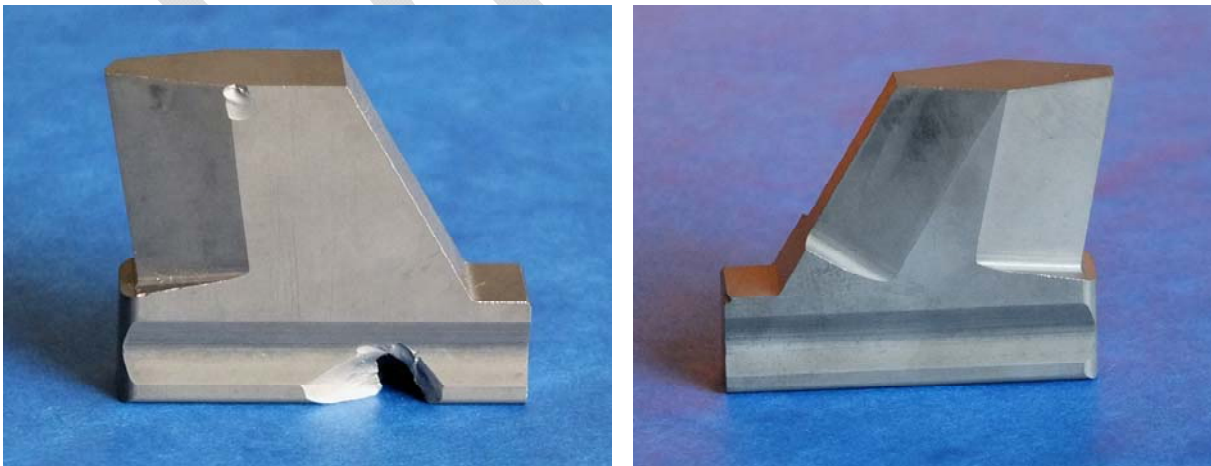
examples of complete UHTC struts (at left, HfB₂/SiC/Y₂O₃ prototype broken during fuel tube drilling and at right HfB₂/SiC sample stopped before the machining finalization)
